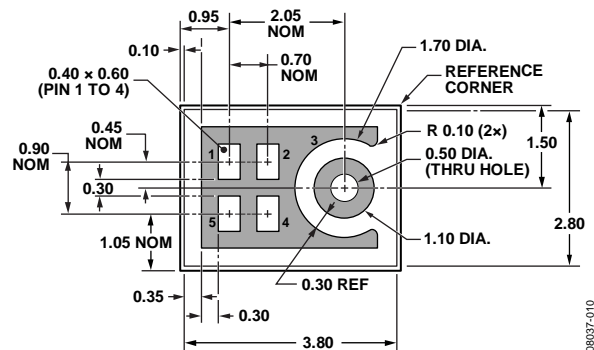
ADMP421 Solder Pads (Dimensions Shown in Millimeters)
